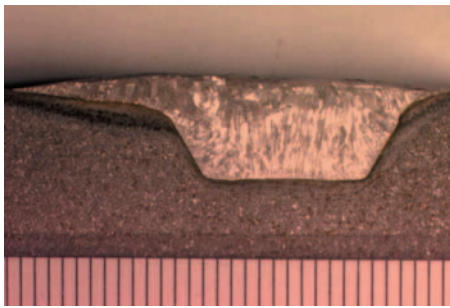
Cross Section of Groove Filled with Inconel 625 Strip (right side, Figure 9).
